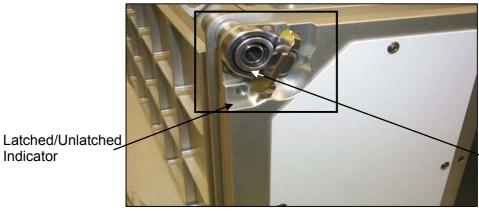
Locker Latch, Top Left (Shown Unlatched).
